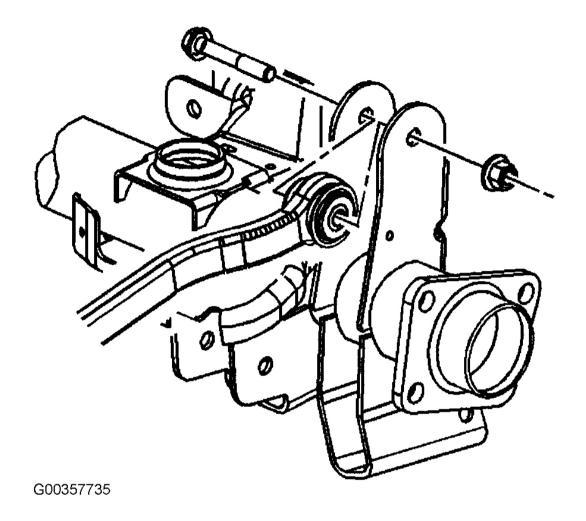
Removing Upper Control Arm Retaining Nut & Bolt From Axle Bracket Courtesy of GENERAL MOTORS CORP.
